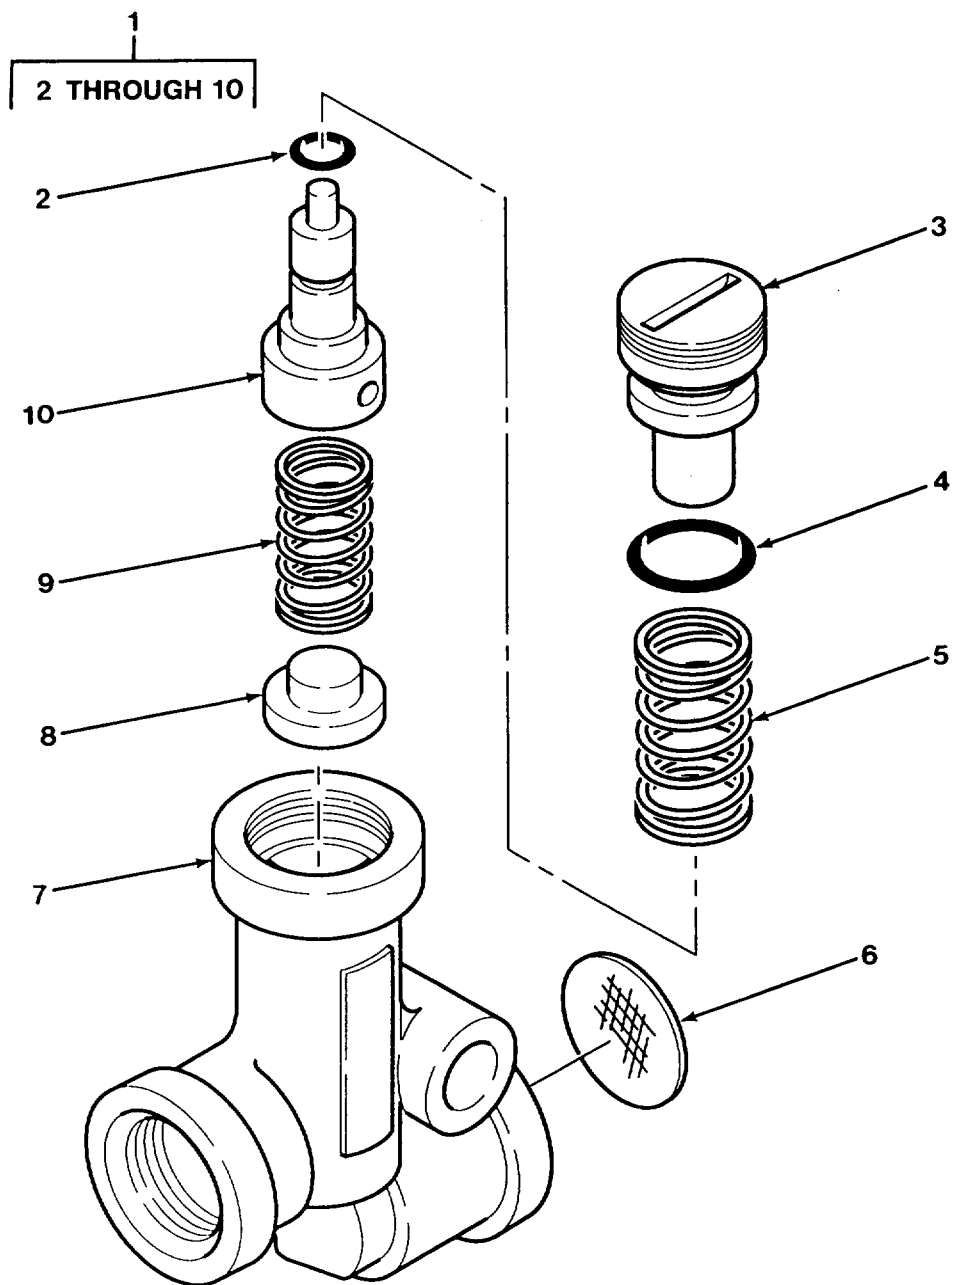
PRESSURE PROTECTION VALVE ASSEMBLY
